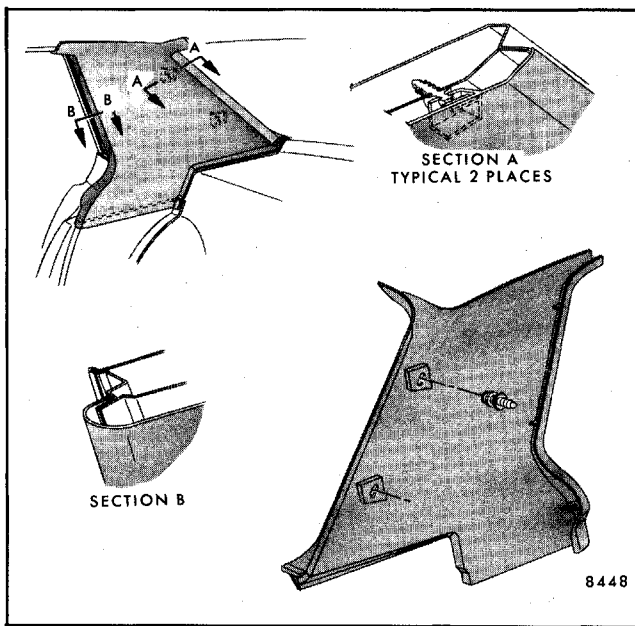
Quarter Upper Trim Attachment - "X-69" Styles
